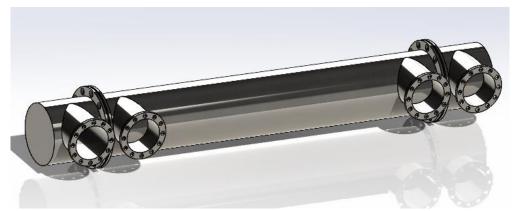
Shell and tube Heat exchanger final design. 2 inlet and outlet are shown for the cold and hot fluid. Tube has a length of 1.7 m.
